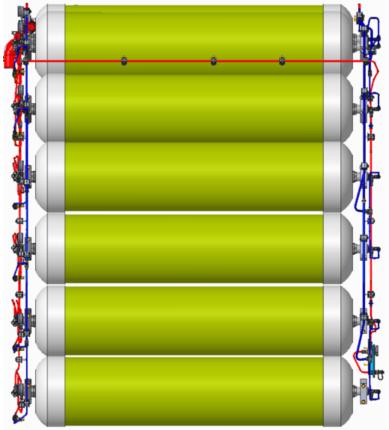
Defueling Tube Assembly for New Heil System - Launched in April 2024
